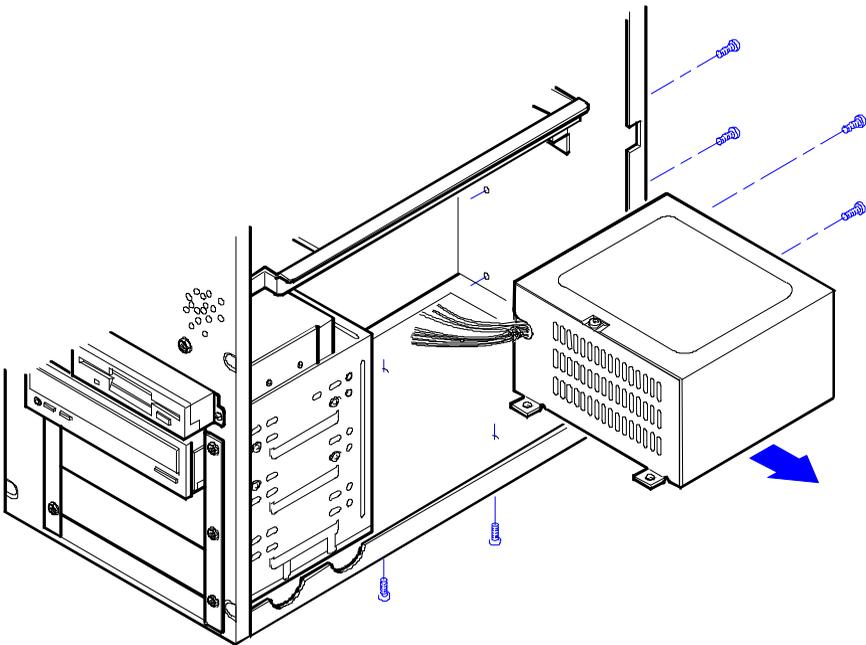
27 Removing the CELEBRIS GL<sup>ST</sup> Power Supply
